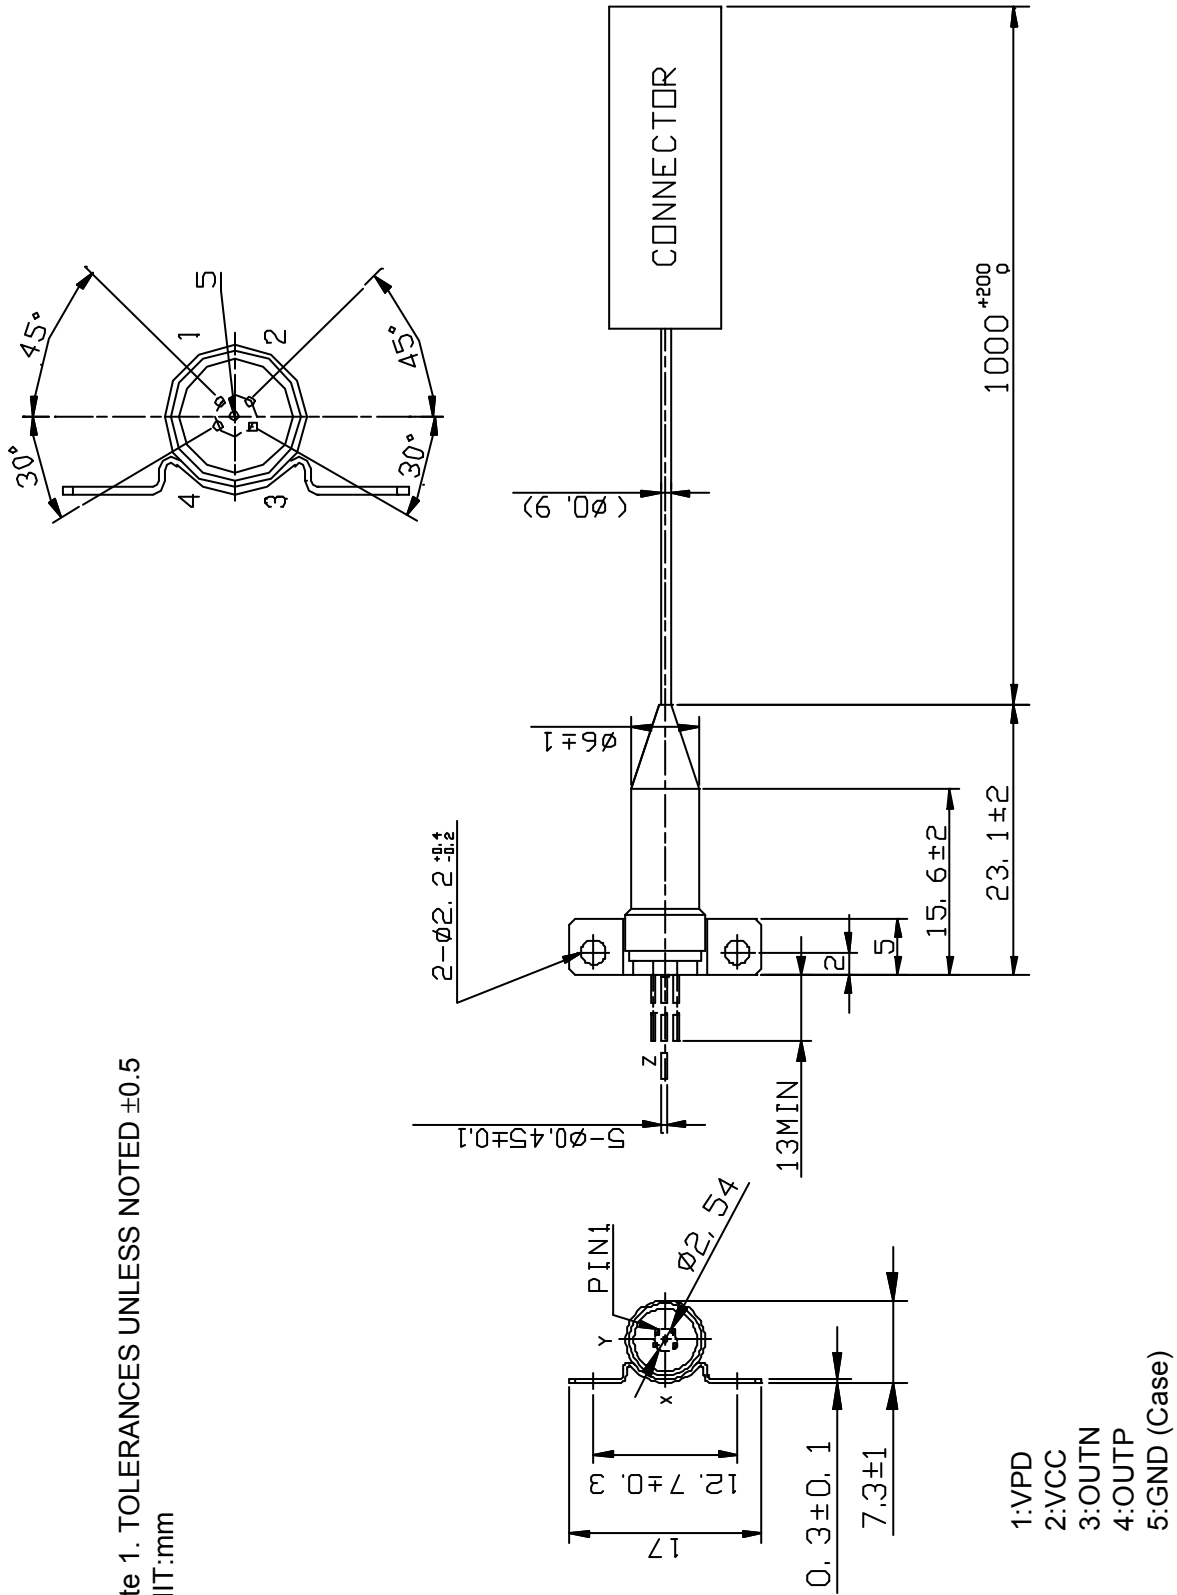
Horizontal mount flange type FU-319SPA-x6M20
